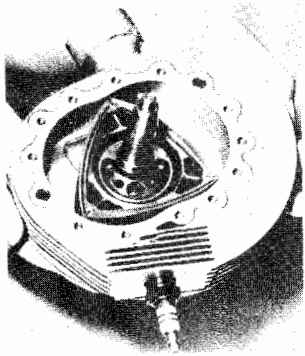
2 Air-cooled rotor housing fin arrangement
